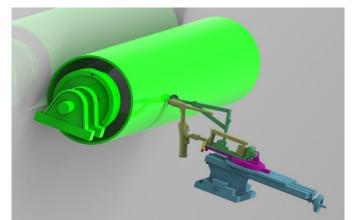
Illustration of XZ-table and gun welding 90 degrees on pipe
